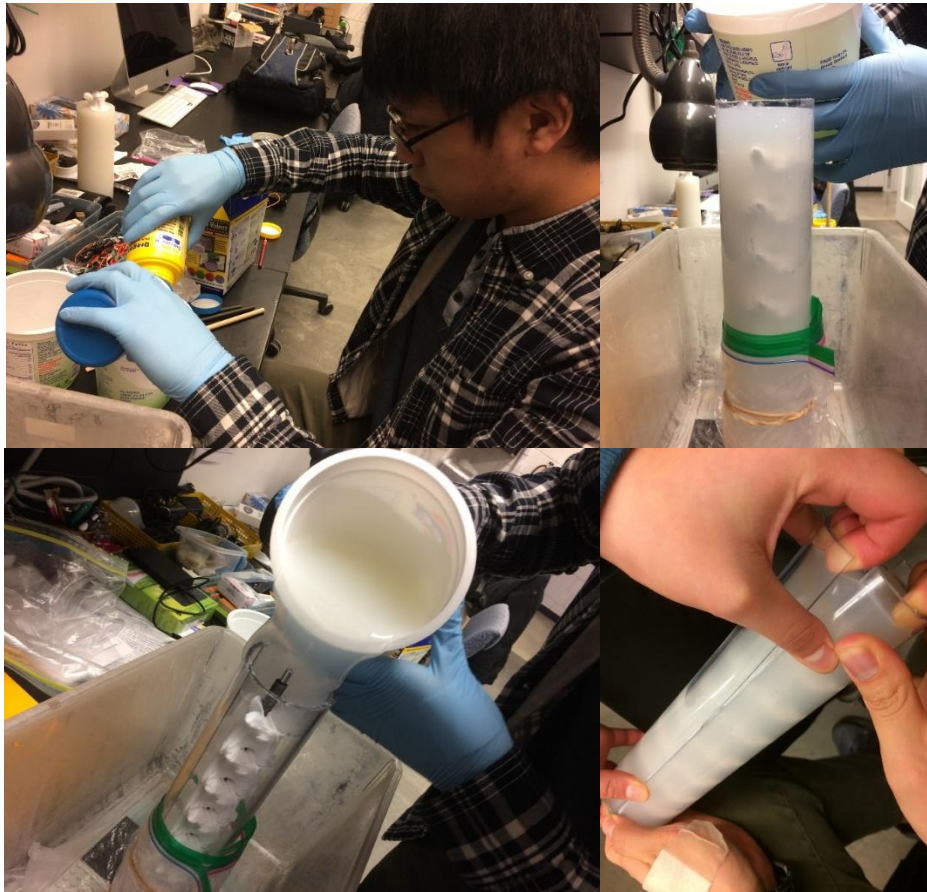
The process of creating the body models using the Dragon Skin FX-Pro silicone rubber solution and the constructed mold. Top Left: The two separately-marked liquids, Part A and Part B, that came with the FX-Pro package were poured in a single container and mixed thoroughly. Bottom Left: The mixture was carefully poured into the mold while making sure that there were minimal air bubbles. Top Right: The Ziplock bags and rubber bands ensured that the silicone rubber solution did not leak out of the mold before it dried. Bottom Right: The two halves of the plastic tube were carefully separated at the end of the cure time to retrieve the finished cast.
